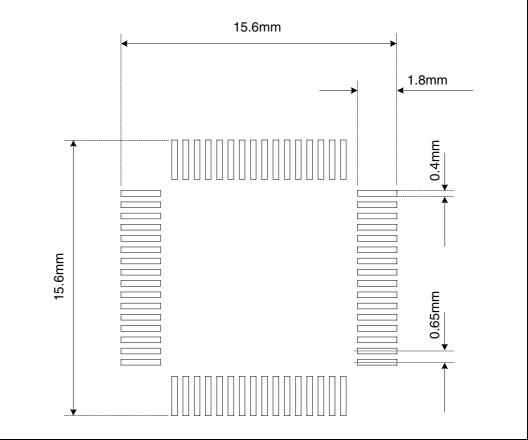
Recommended dimensions of the footprint for mounting the NQPACK
